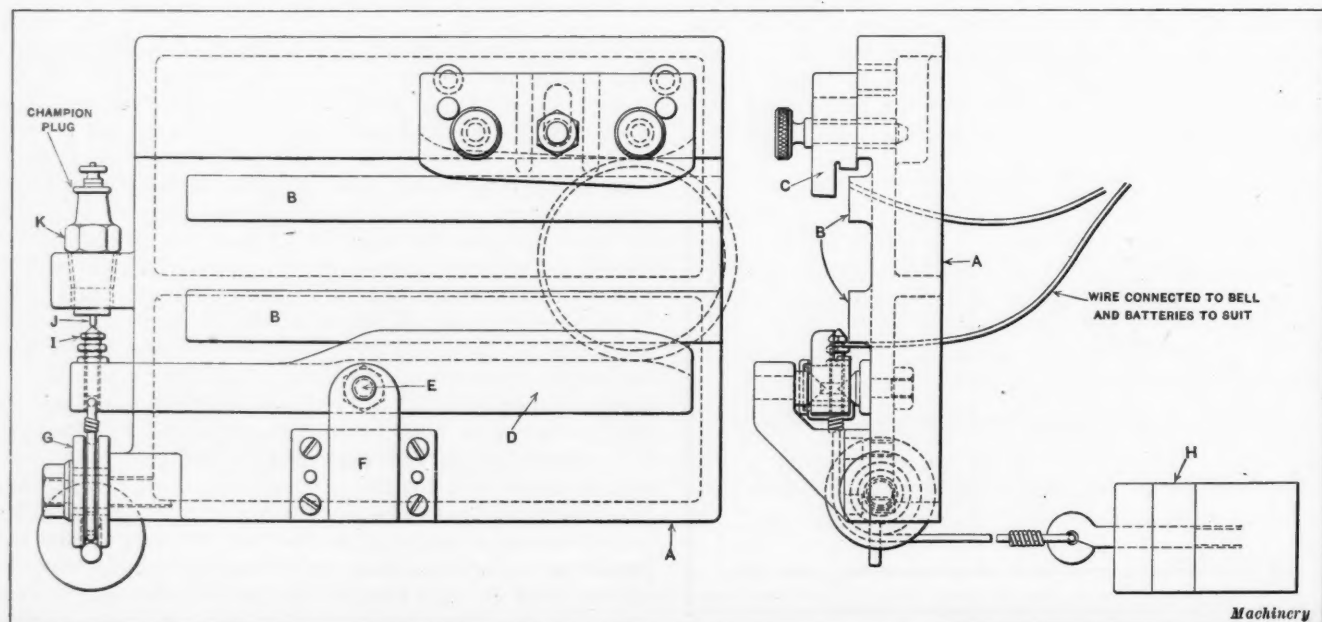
Piston Ring Testing Device depending on its Reading on the Sense of Hearing
